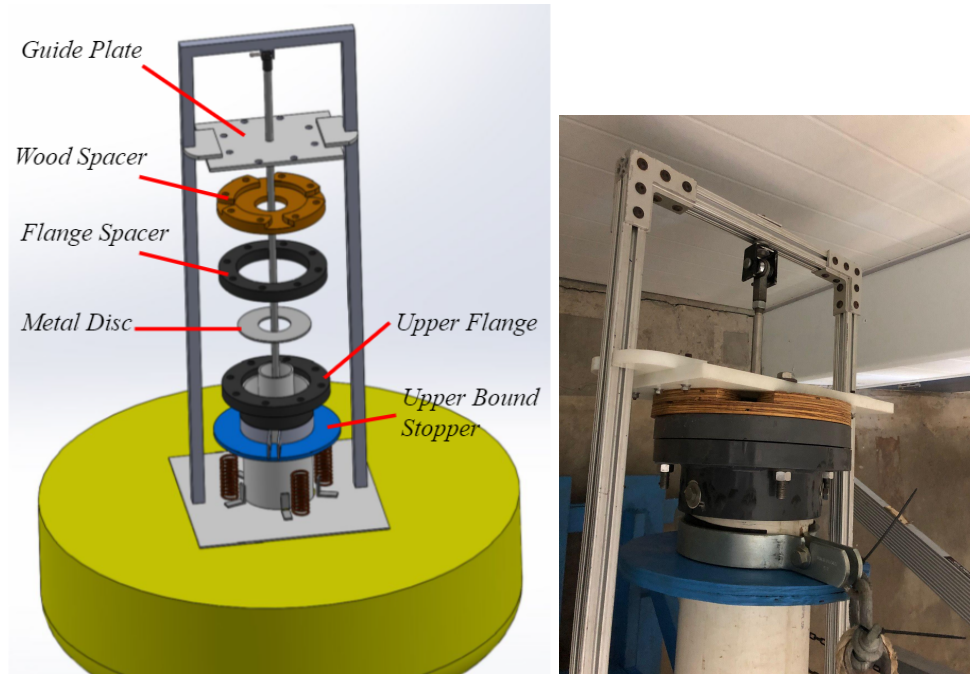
(left): Exploded view of the components at the top of the spar in Solidworks
